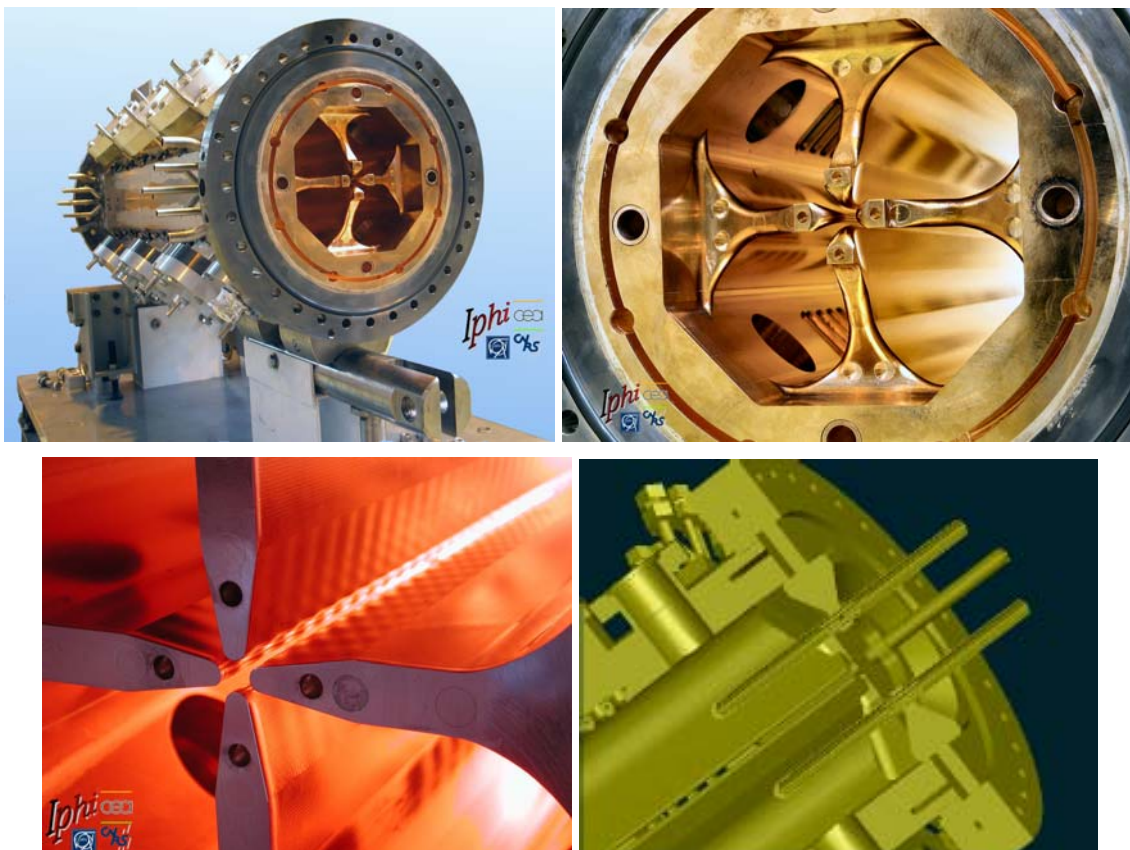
(Up-Left) First meter of the IPHI RFQ after brazing at CERN. (Up-Right) Radial section of the IPHI RFQ. (Down-Left) View of the RFQ vanes machining. (Down-Right) Drawing of the coupling plate.
